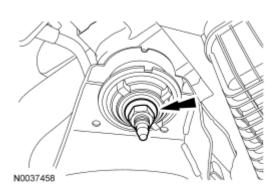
Positioning Special Tool (014-00765) Under Subframe Assembly Courtesy of FORD MOTOR CO.
